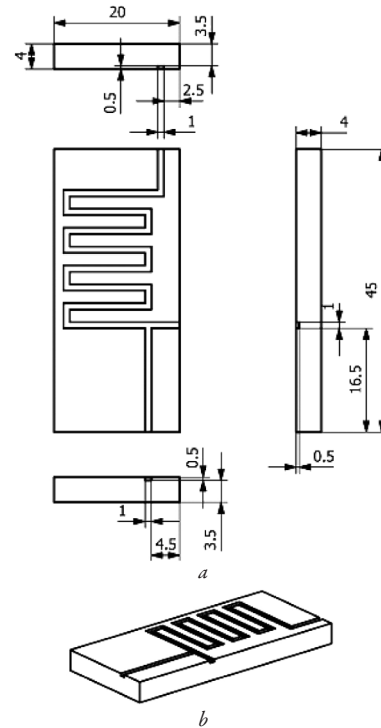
Microfilter scheme: a – drawing with dimensions; b – 3D design
